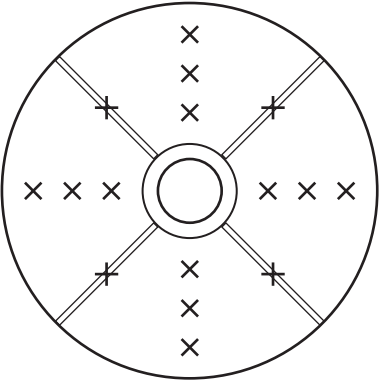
To check the rotor for flatness, measure the distance from main frame support to media and spokes at location marked by an “X” in this illustration. If the rotor contains more than four wedges, the same measurement locations should be used for the additional wedges and spokes.
